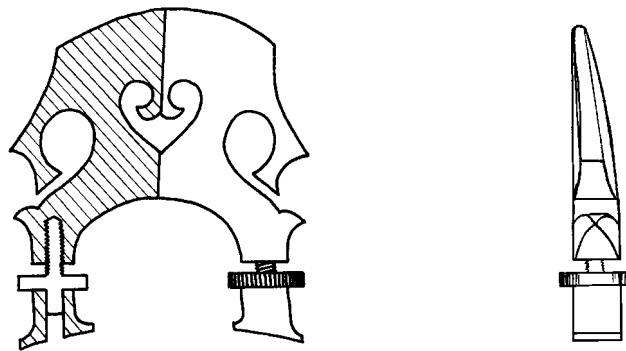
Technical frontal and side view of bass bridge fitted with bridge height adjusters, with cutaway of bridge foot at left.
